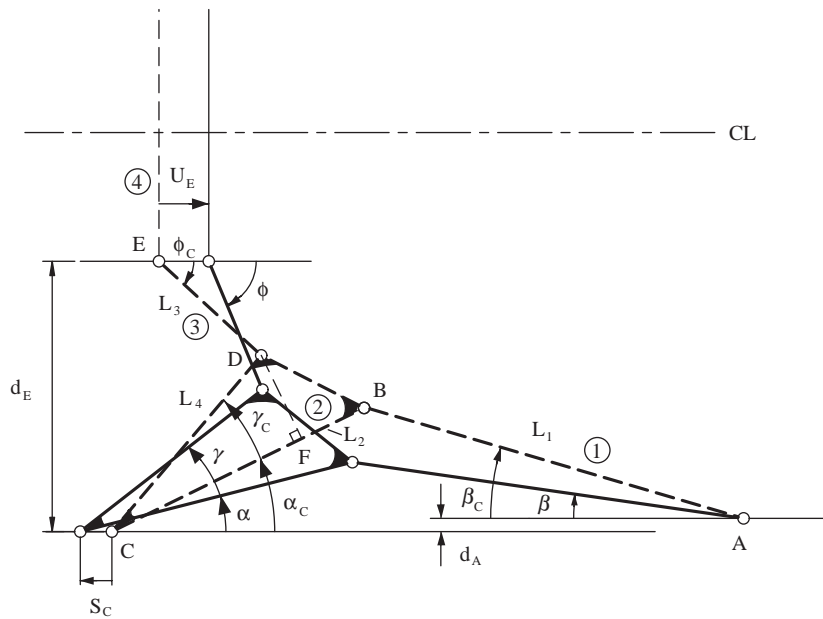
Geometry of the toggle linkage during real-mold clamping.
